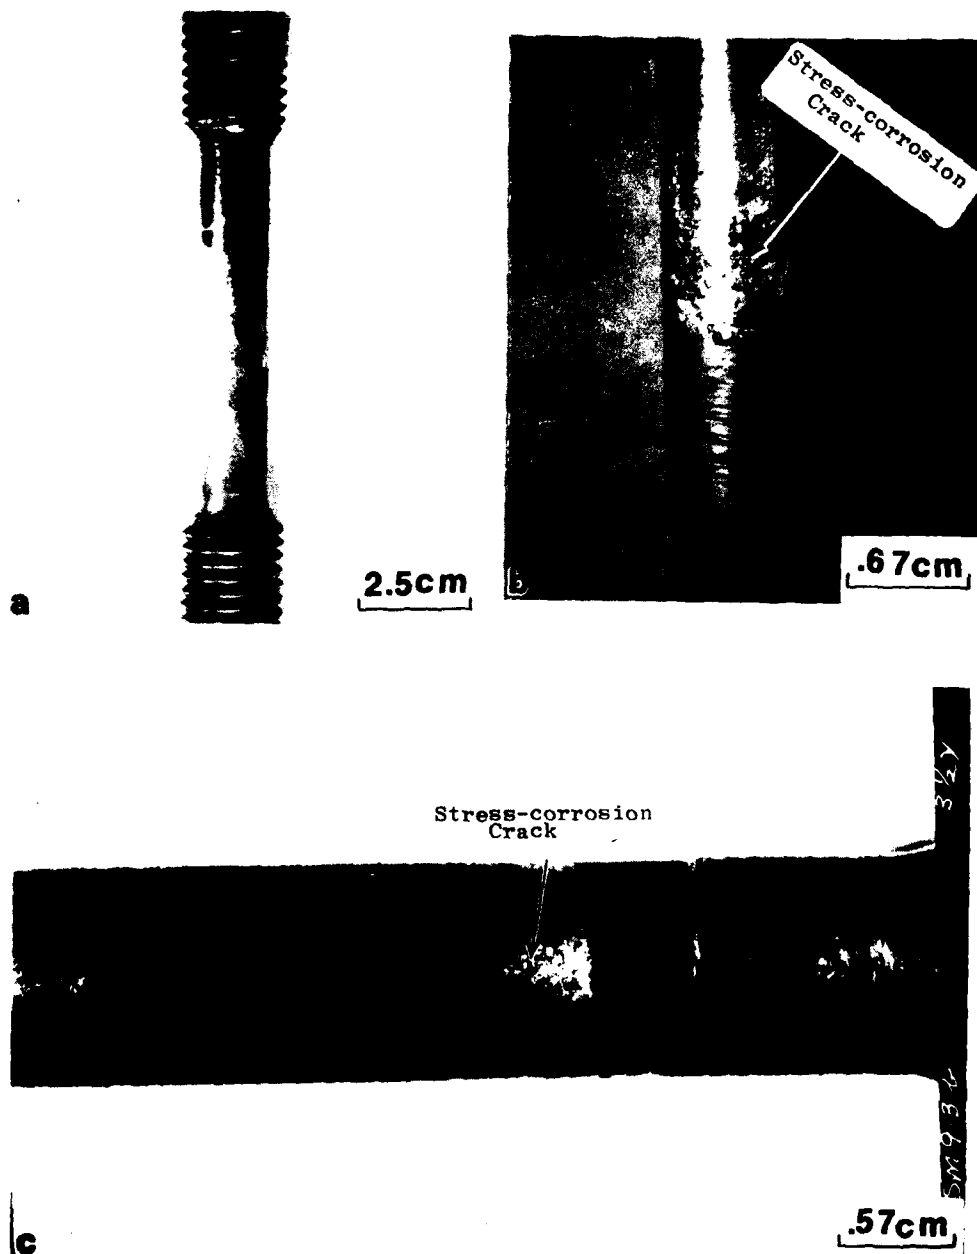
Optical photographs of A508-2 tensile specimens used in the SCC testing. Photograph (a) shows the entire specimen, photographs (b) and (c) show some of the larger cracks that developed on the gage section following exposure to reactor-grade water at 93°C for 2000 hr.
